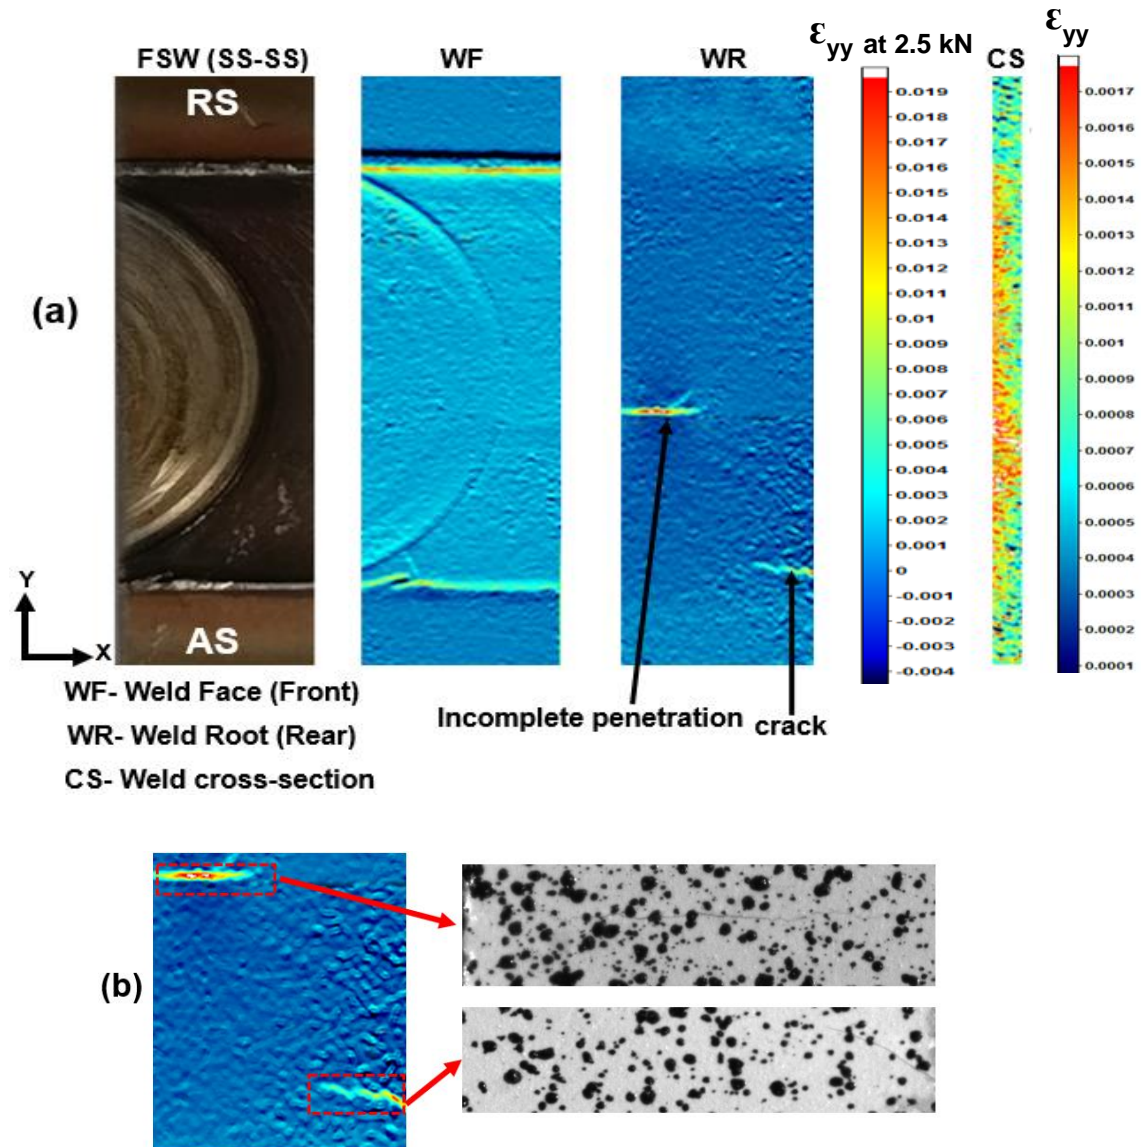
(a) ϵ_{yy} strain map of the FSW (SS-SS) weld along the weld face (WF), weld root (WR), and weld cross-section (CS) at 2.5 kN; (b) defect locations on the WR [34]
